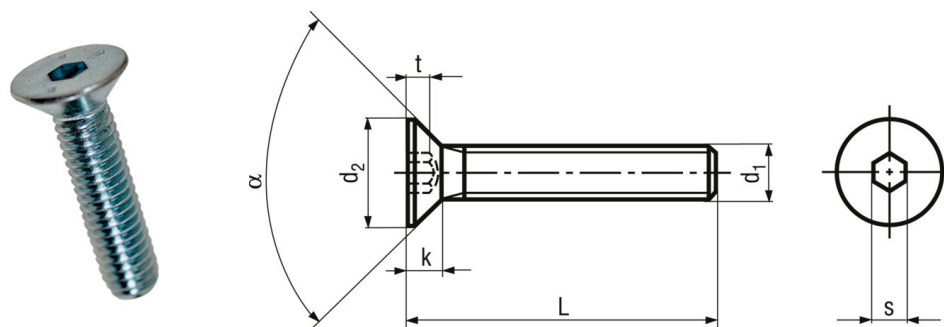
Countersunk head screw M4X20 DIN 7991 A2 [20]
